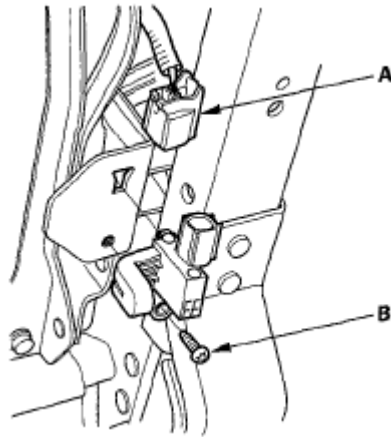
Identifying Seat Position Sensor Harness 2P Connector
